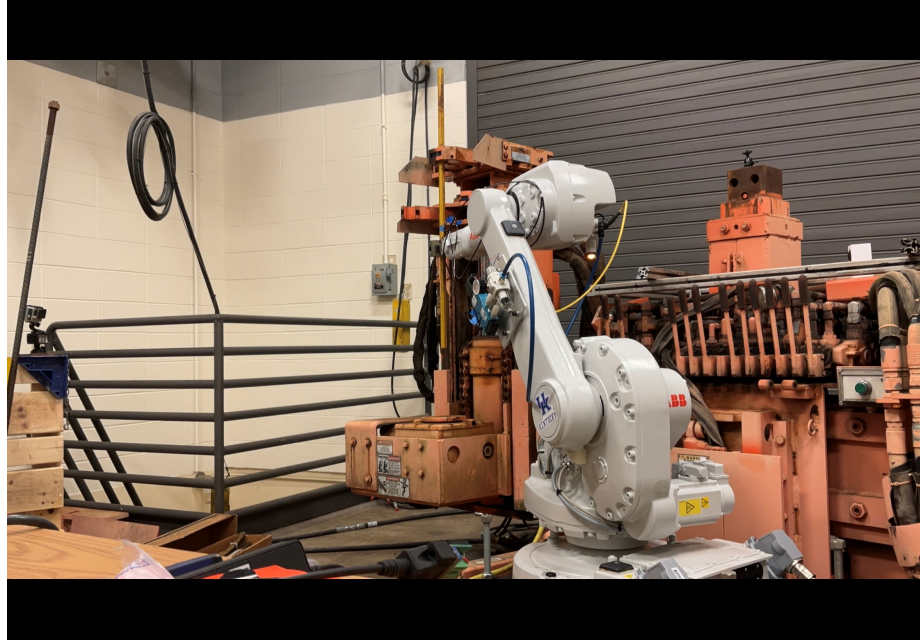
The robot accurately places the drill steel into the clamps. On the contrary, the robot cannot accurately place the drill steel into the chuck
